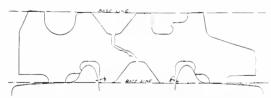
Standard Reference Gage for Mounting and Inspecting Wheels, as Used for Inspecting. Sheet 12.
